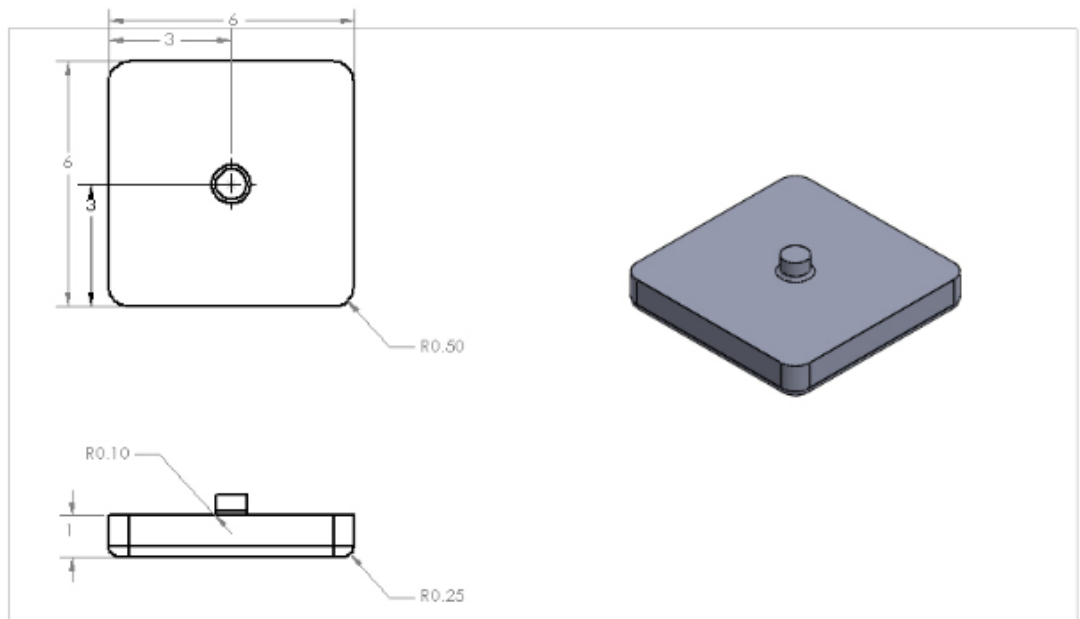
A SolidWorks drawing of one of the inflatable pads.
